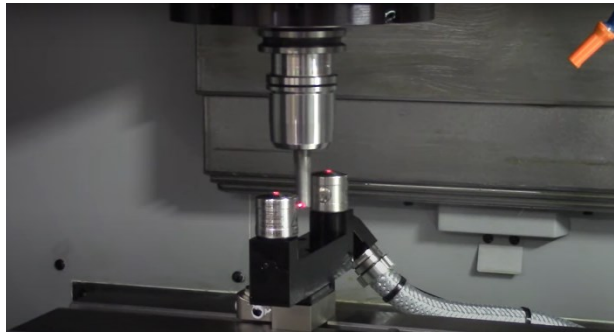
The cutter length is measured with a laser tool setter on a CNC machine.
